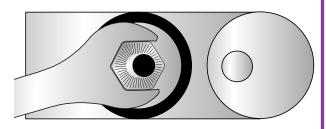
Outer Bush Caster Adjustment - Sleeve Position for maximum negative camber
